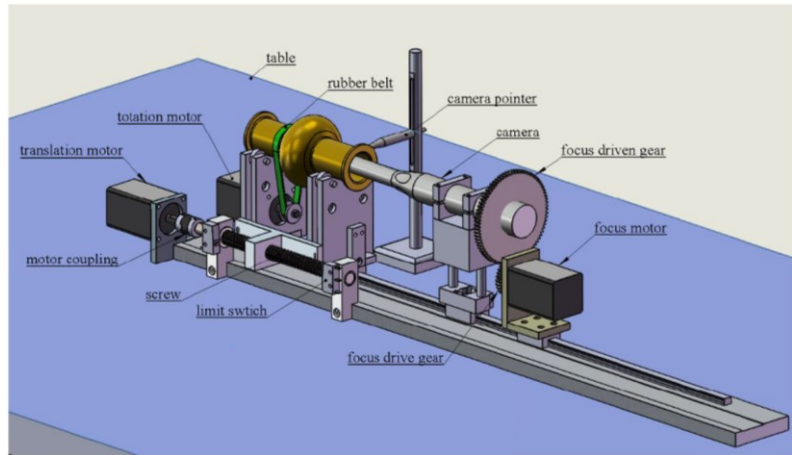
schematic diagram of the optical inspection system [80].
